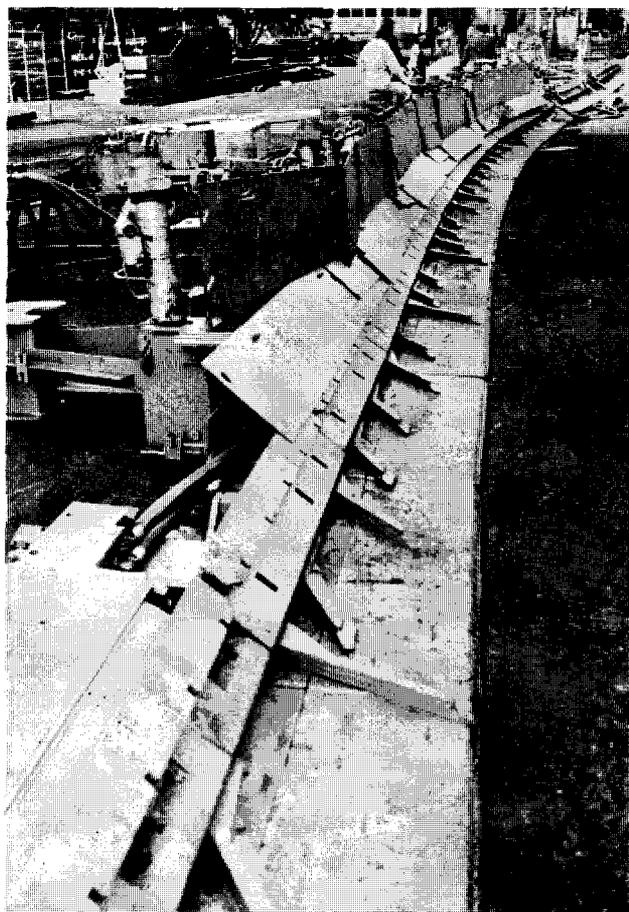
A reciprocating-flight conveyor with barricade and chocks being assembled on surface
